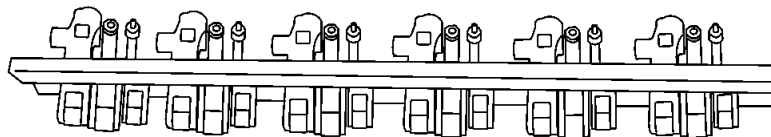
Volvo D12C Rocker Arm Shaft Assembly
